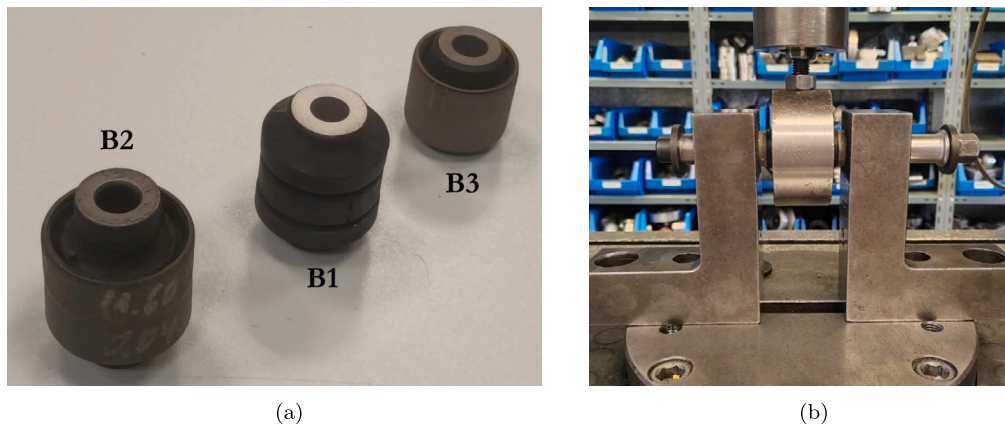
(a) RCBs manufactured by CMP Automotive which are used in the experimental validation; (b) assembly of the rubber bushing in the servohydraulic testing machine.
